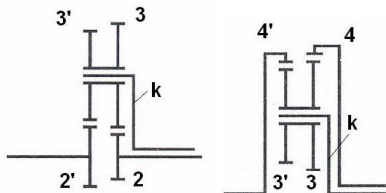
The planetary gear K+K on the left and on the right planetary gear B+B can be seen (K-external gear connection, B-internal gear connection)
